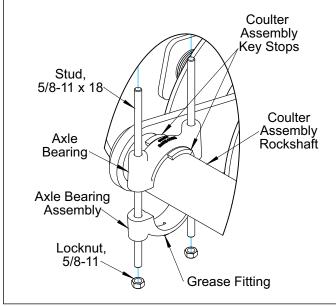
Hydraulic Coulter Gang Axle Bearing Installation
